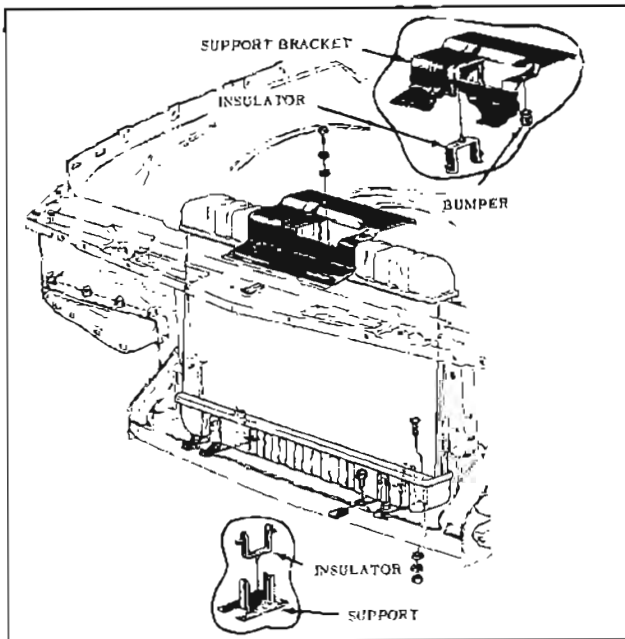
Radiator Supports (All Except 3147 and/or A/C Equipped Cars)
